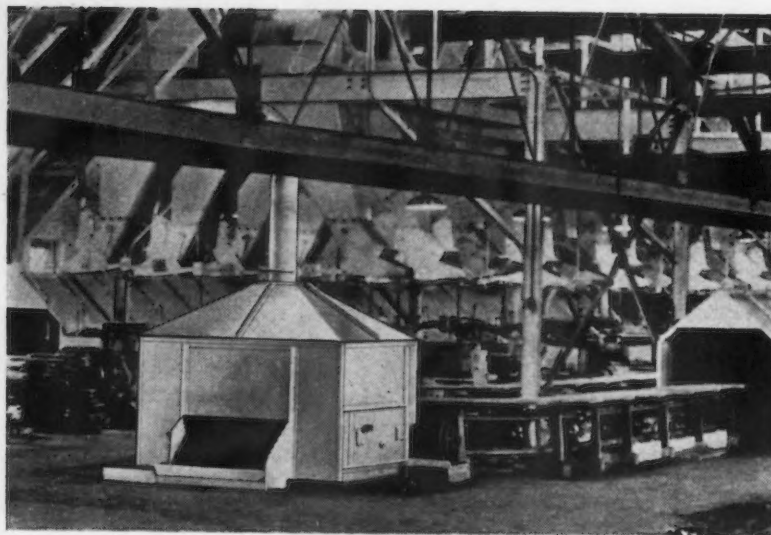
Box-type enclosure for shakeout grate with overhead ventilation. Photo courtesy American Air Filter Co.
